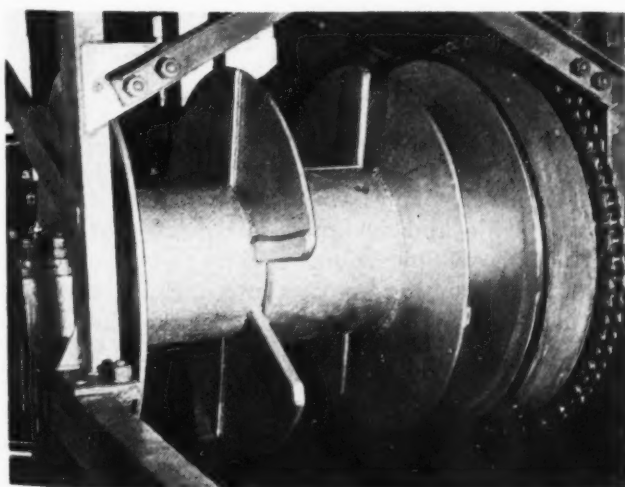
Reel Made of Steel Plate and Pipe Cut to the Required Shape and Joined by Welding
